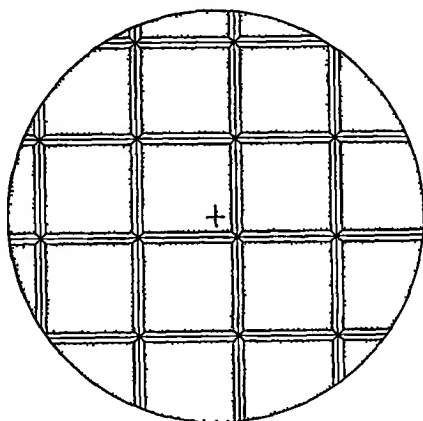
A pitch tool with the V-grooves cut out ready for polishing
